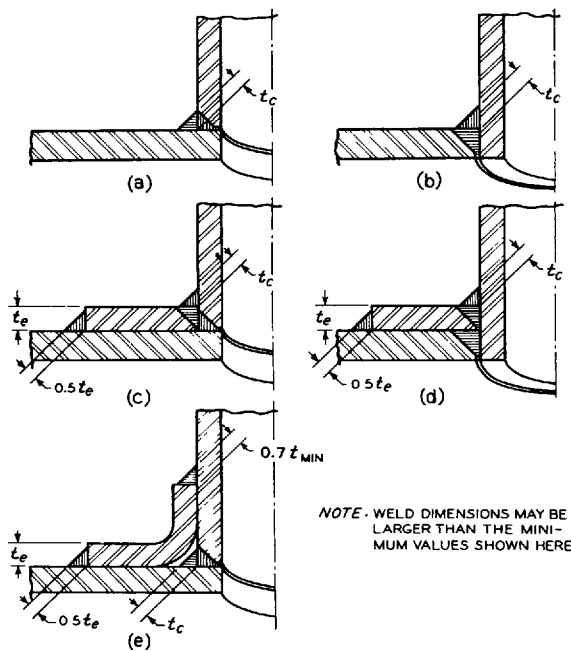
D SOME ACCEPTABLE TYPES OF WELDED BRANCH ATTACHMENT DETAILS SHOWING MINIMUM ACCEPTABLE WELDS
